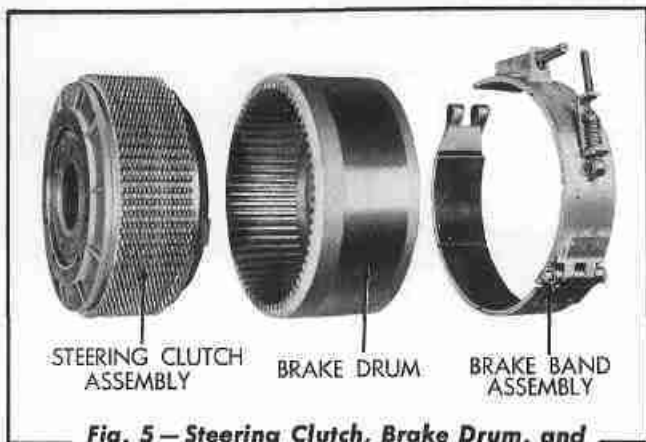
Steering Clutch, Brake Drum, and Brake Band
